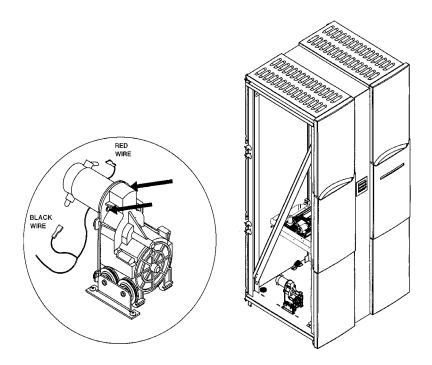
Cables and Mounting Screws on the Vertical Motion Motor
